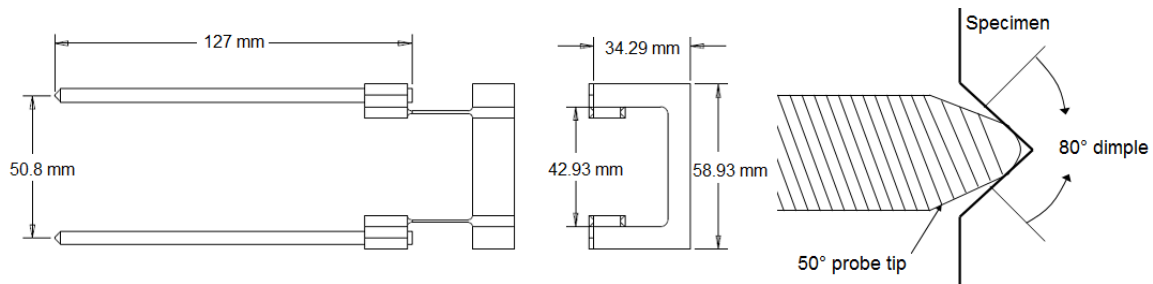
Drawing of high temperature side-contact axial extensometer
